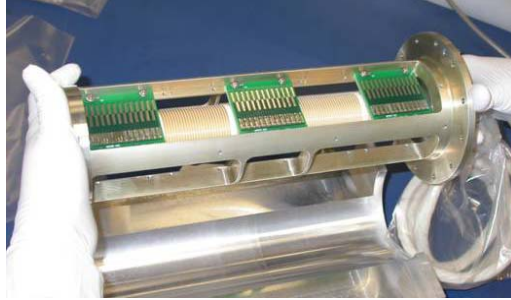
Slip Ring Assembly (SRA) showing double gold brush pairs, double v-groove gold rings
